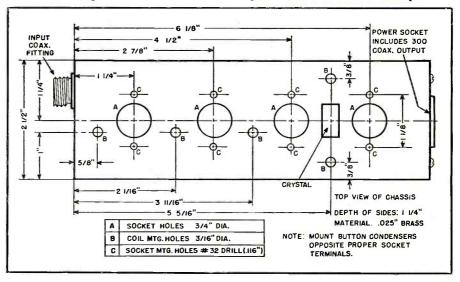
Layout for converter chassis. Arrangement should be followed exactly.
